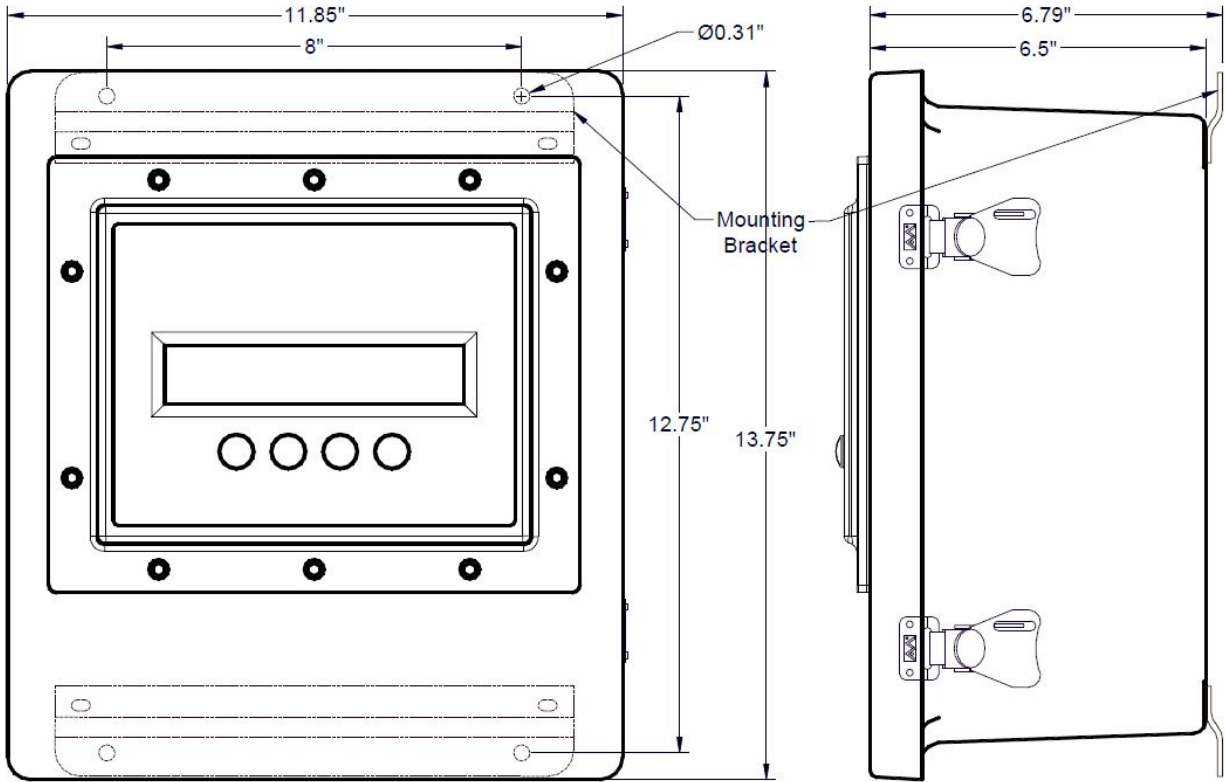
X40-08-N4X MOUNTING AND DIMENSIONS
